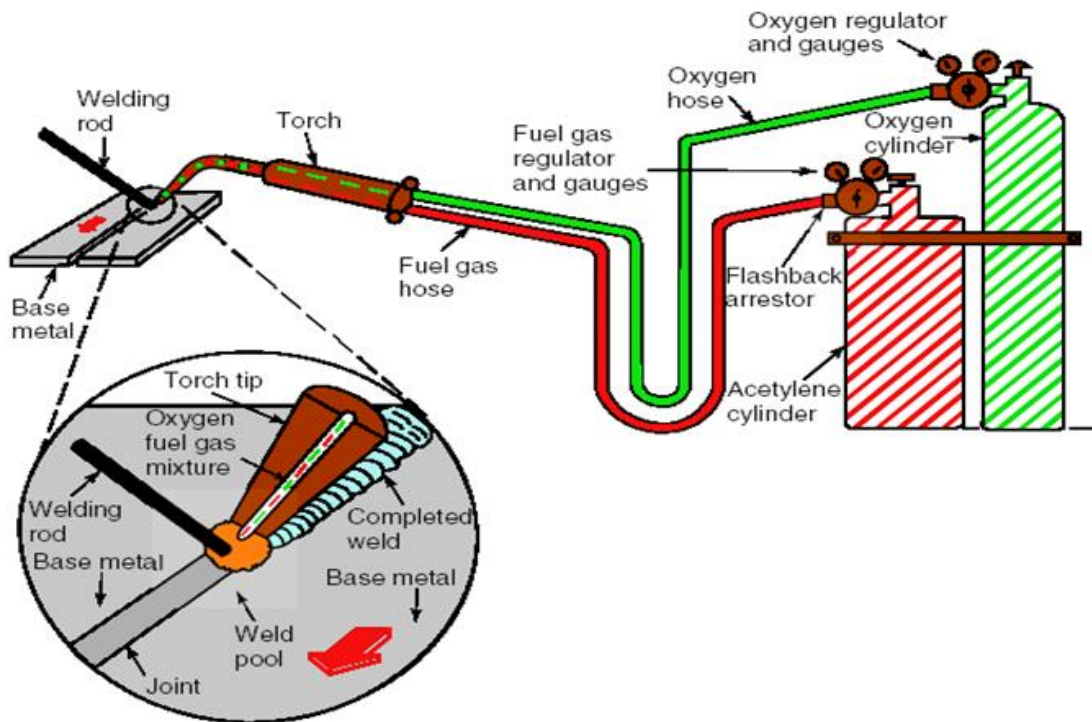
Typical Oxy – Acetylene Gas Welding Work Station
